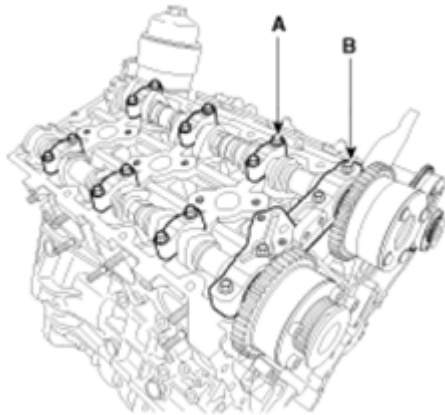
Identifying LH/RH Camshaft Bearing Cap And Thrust Bearing Cap
